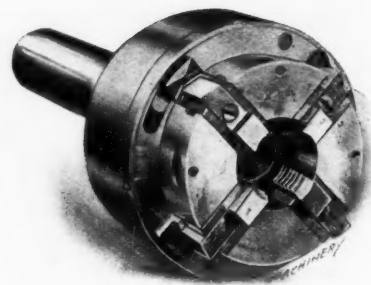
View of Chaser Guides with Chasers and Carriers in Place
